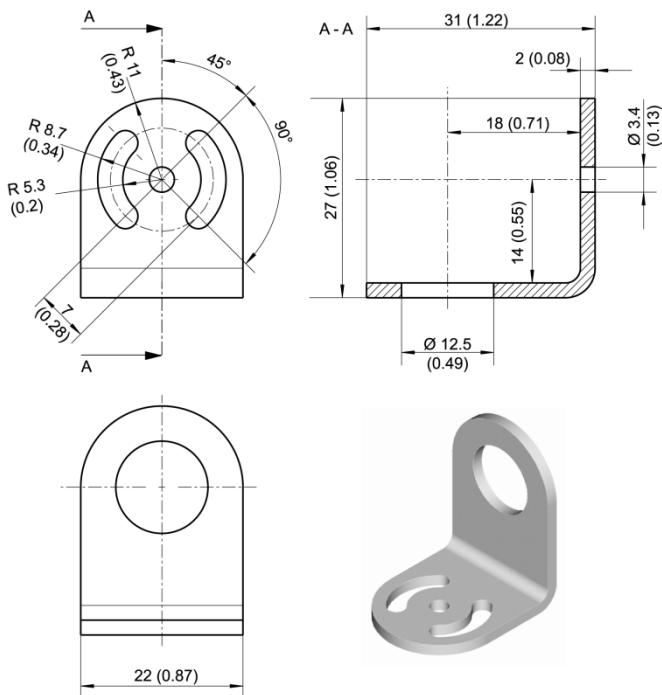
Fixed Mounting Bracket (XXXMIACFB)
